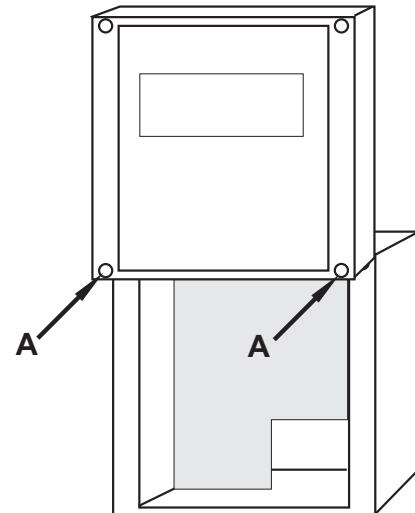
, Use the two bottom screws to fix the front cover at the upper edge (A) during installation.
